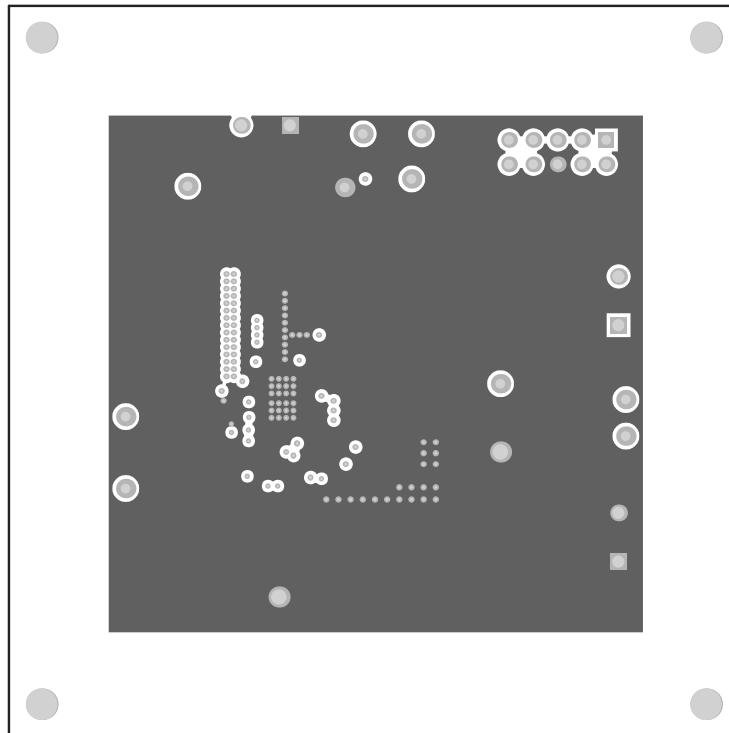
through Figure 9-5 show the design of the PWR-634EVM printed-circuit board (PCB).
